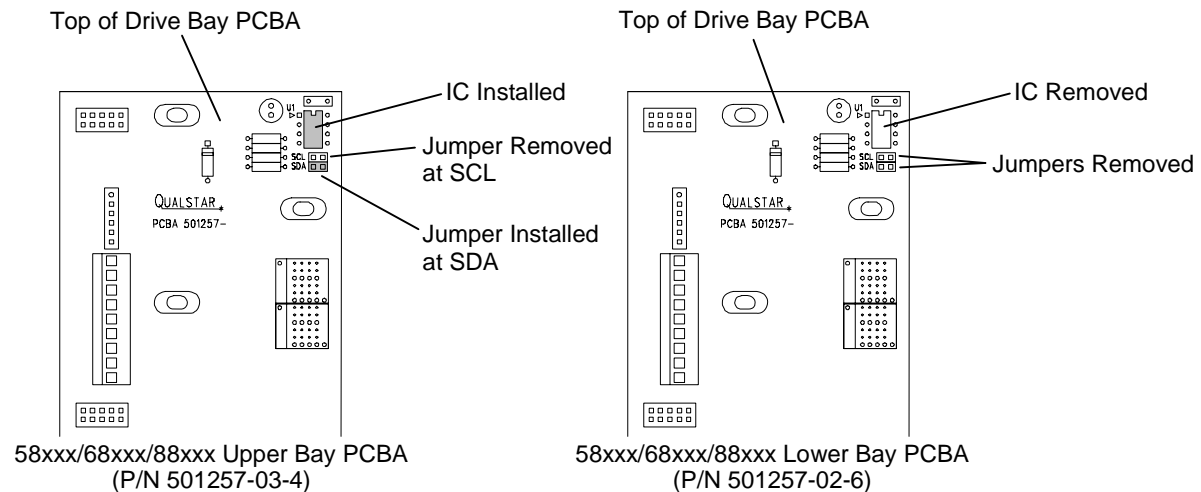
58xxx, 68xxx and 88xxx Model Drive Bay PCBA Jumper and IC Configuration
